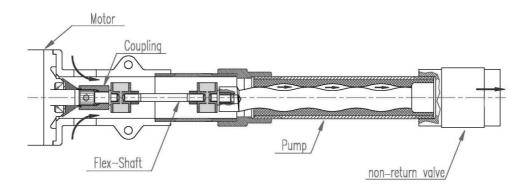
Cross-section of typical helical rotor pump end (Foster et al, 2009).
